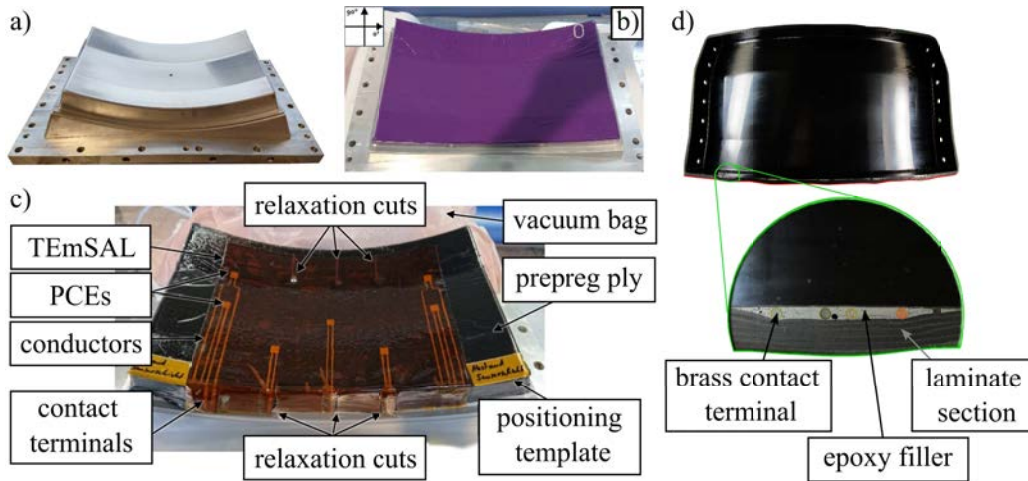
Manufacturing of generic containment specimen with a) mould; b) Prepreg plies applied to mould during preforming; c) Integration of TEmSAL during preforming and d) generic containment structure with uncovered contact terminals
